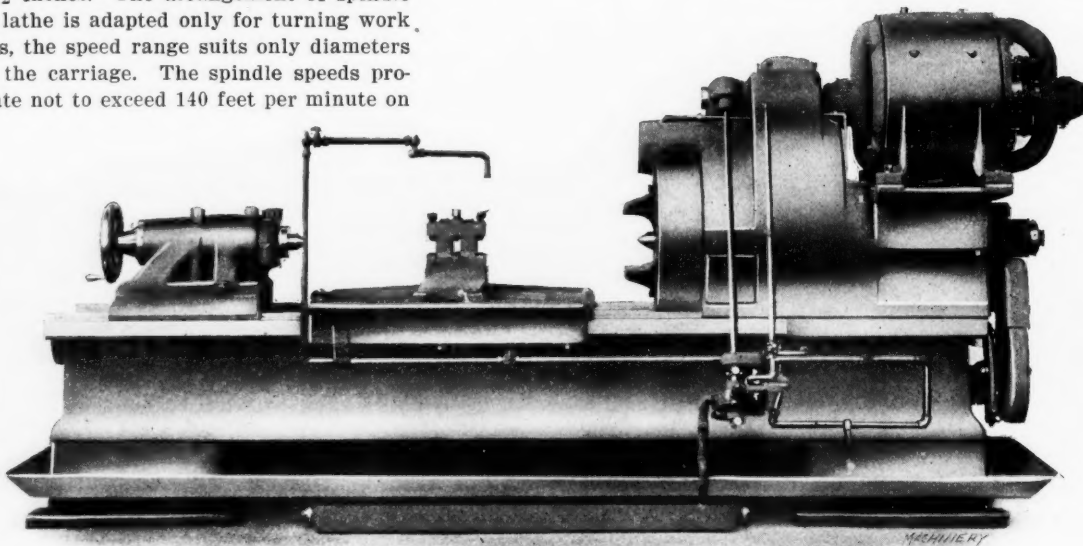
Rear View of Forge Lathe showing Separate Pumps for Oiling Headstock and Supplying Lubricant to Cutting Tool
